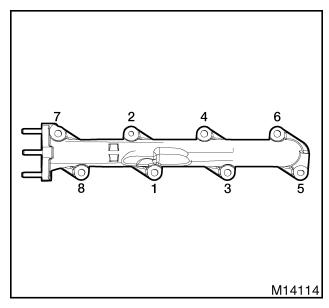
Torque sequence for right exhaust manifold mounting bolts
